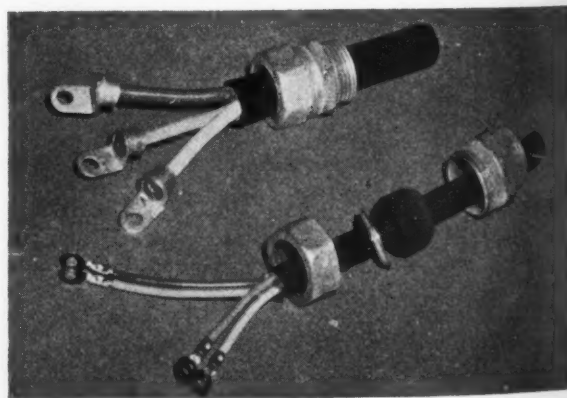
Oiltight bushings effectively seal cables and clamp them to the machine part. Cables are color coded with terminals mechanically staked
